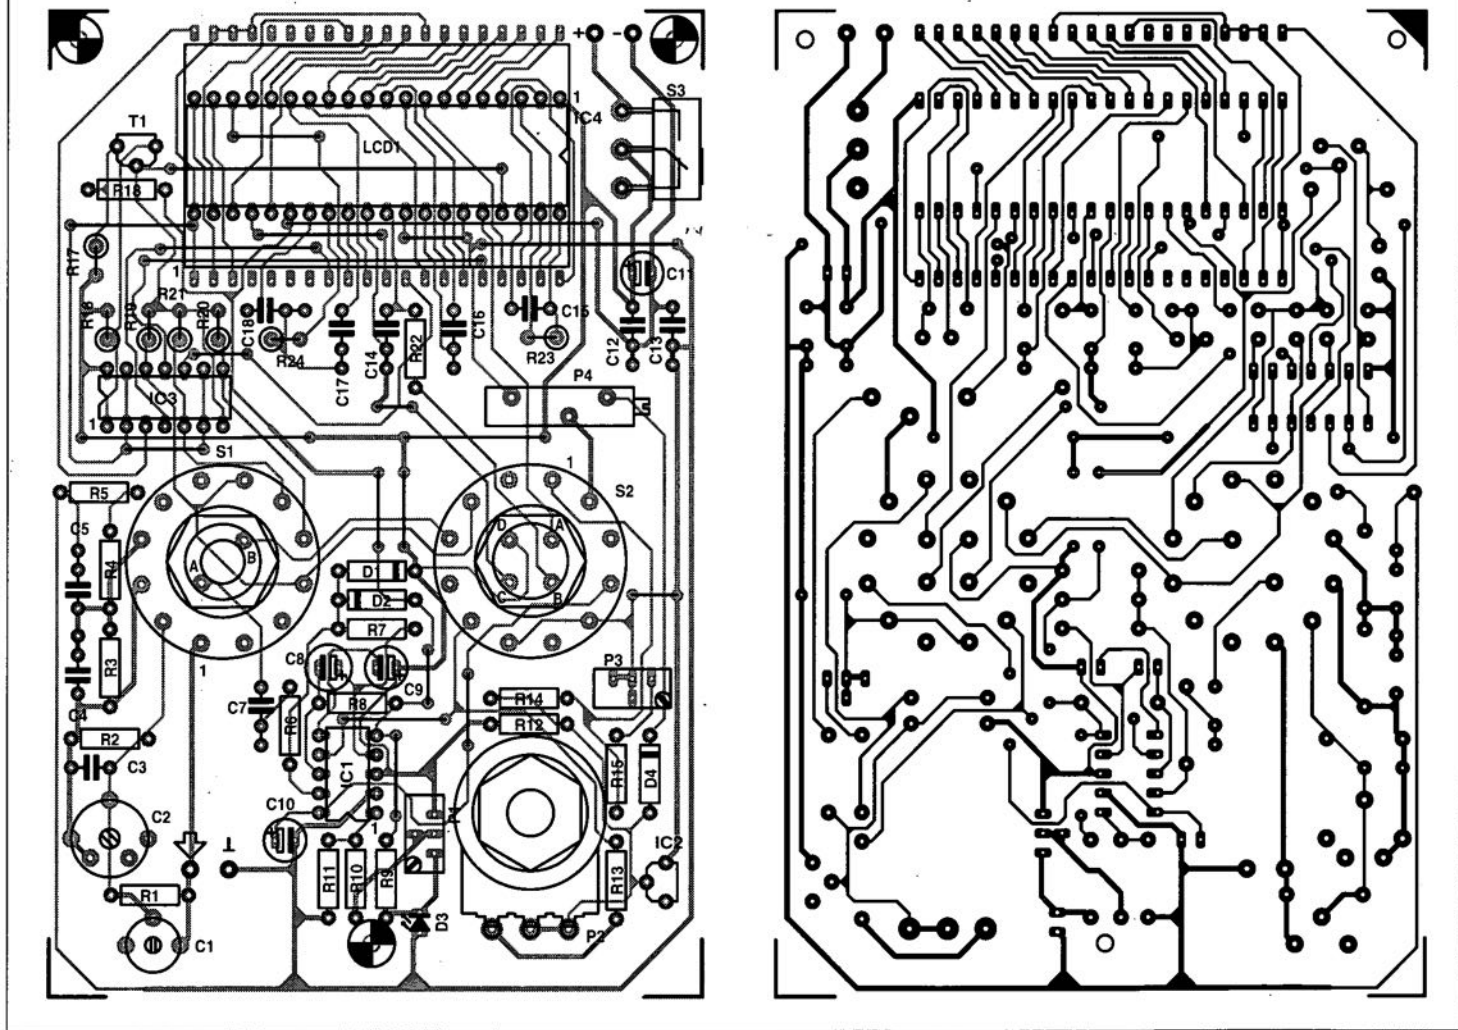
Printed-circuit board for the r.m.s. a.f. voltmeter.
